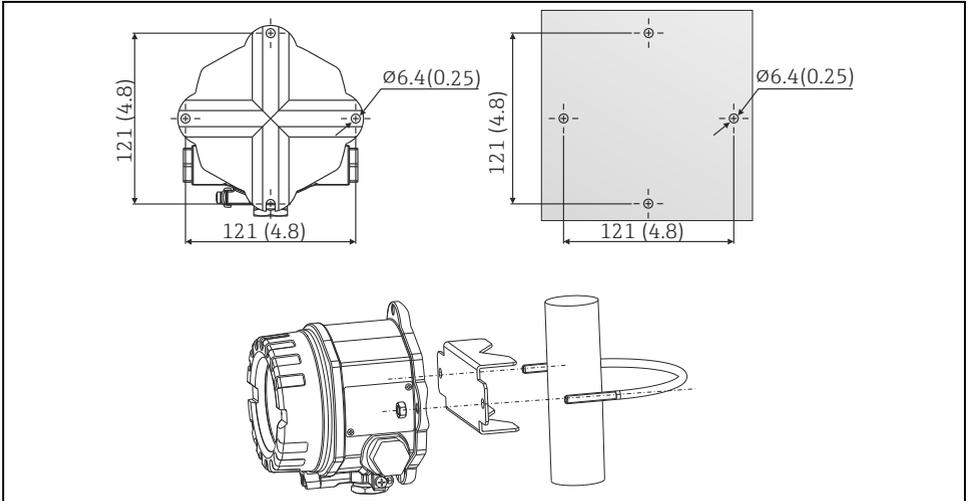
Direct wall or pipe mounting (dimensions in mm (in))
